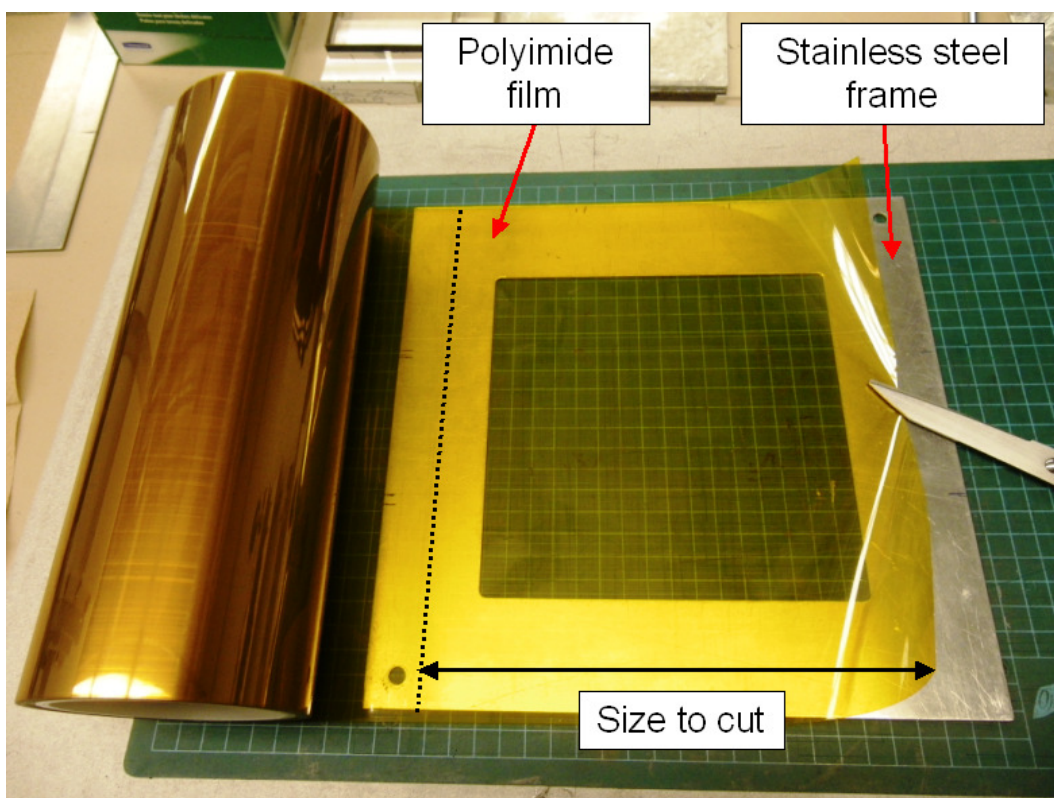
Picture corresponding to step 1 of the MEA assembly process. Note that the size of the films should be smaller than that of the stainless steel frame.
